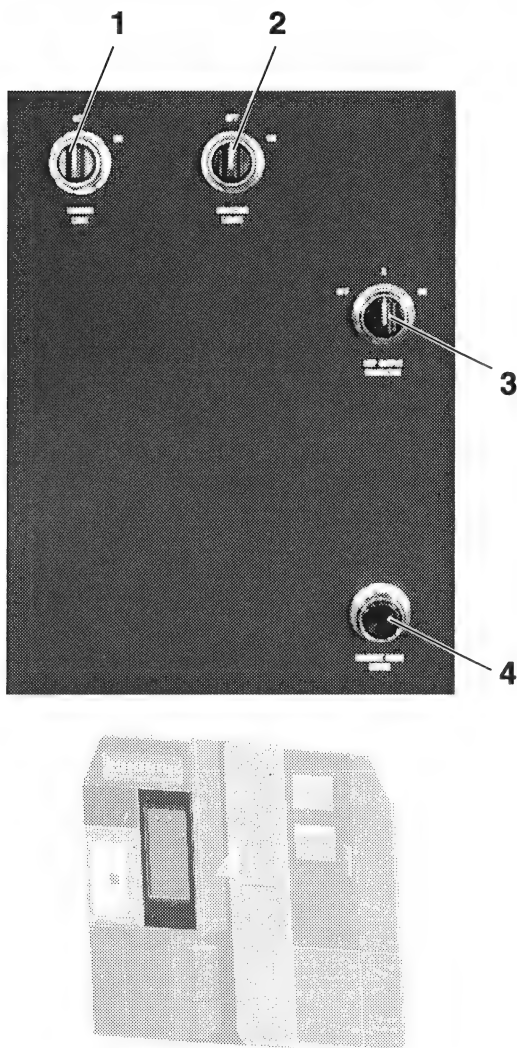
Switch panel, Cab B rear wall (CRWPB)
